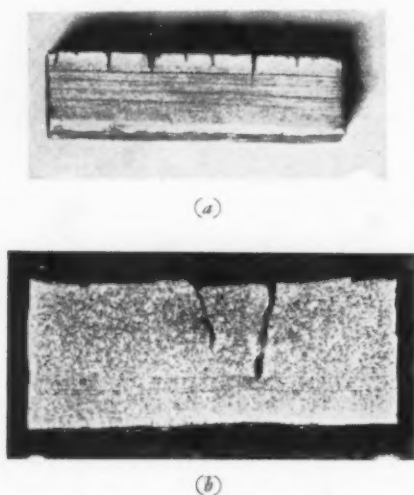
CORROSION FATIGUE CRACKS
